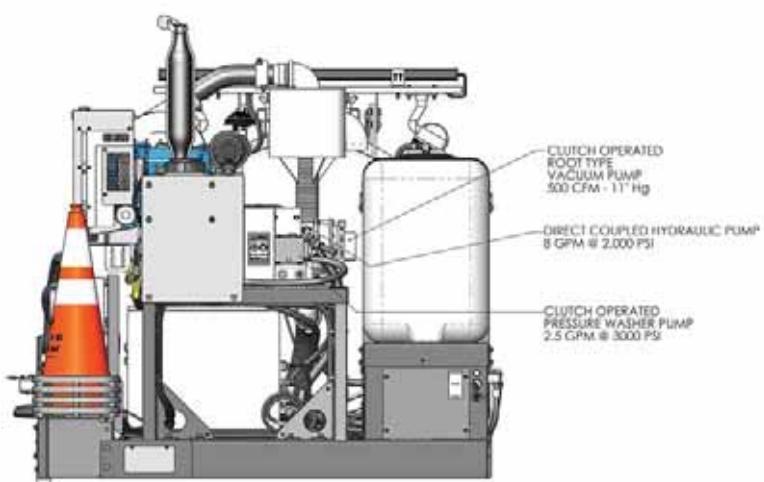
The drawing shows the front view of the SB VMS (both engine configurations).
